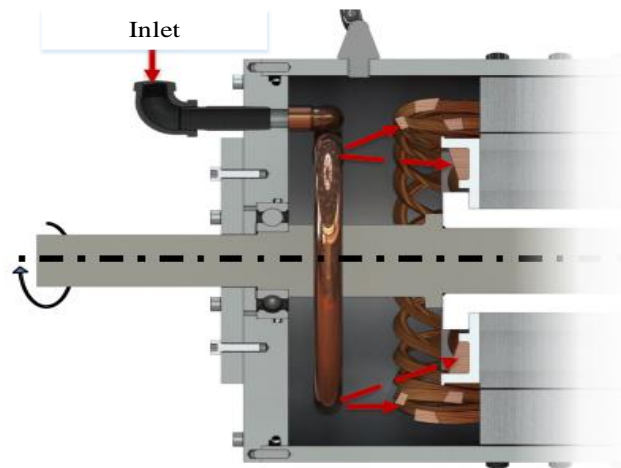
A spray cooling on the stator and rotor end windings [91].
